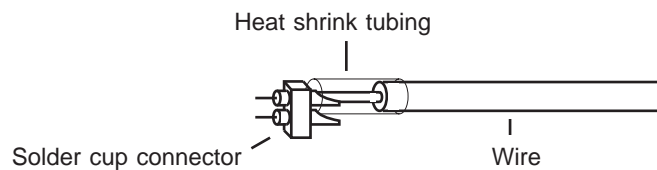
Detail of connector wiring. Strip insulation from the wire, tin with solder, solder the wire to the solder cup, and apply heat to heat shrink tubing to insulate the connection.
